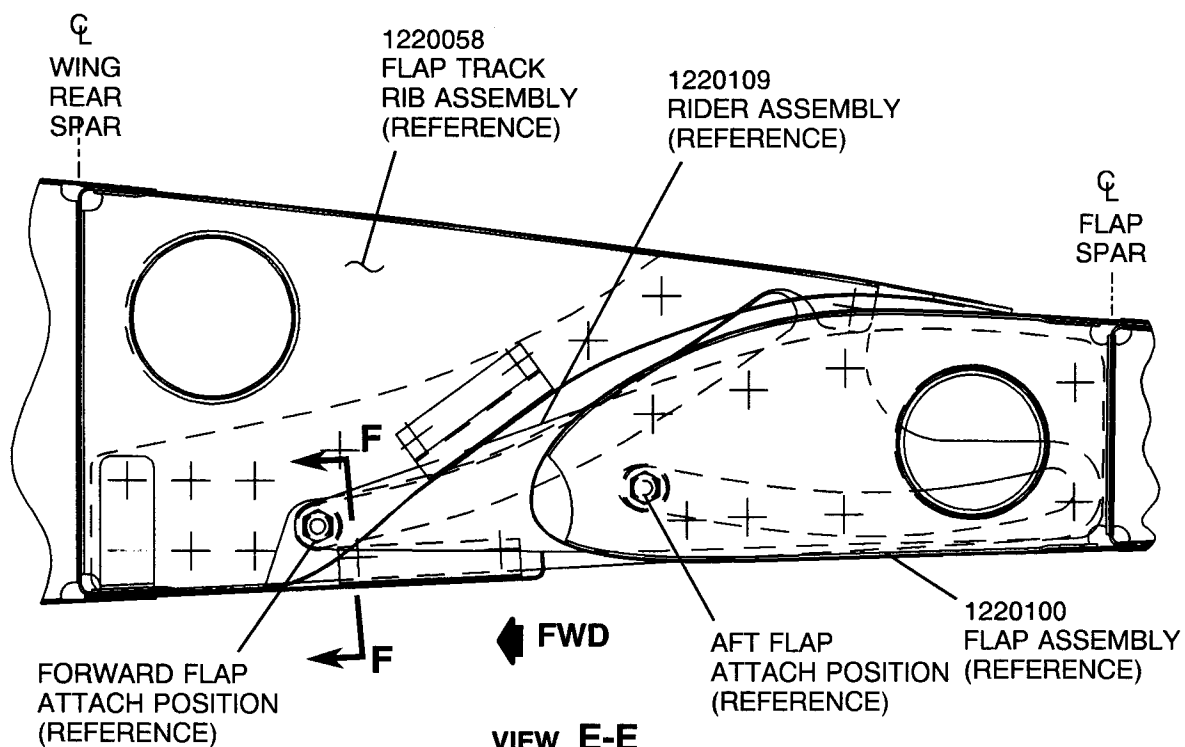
Flap Support Rib Assembly and Roller Bearing Replacement (Sheet 7)
